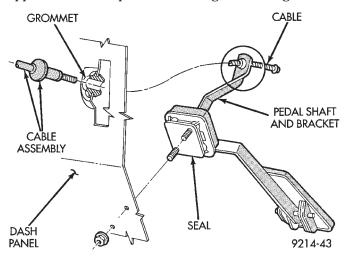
Accelerator Pedal and Throttle Cable—Front View
